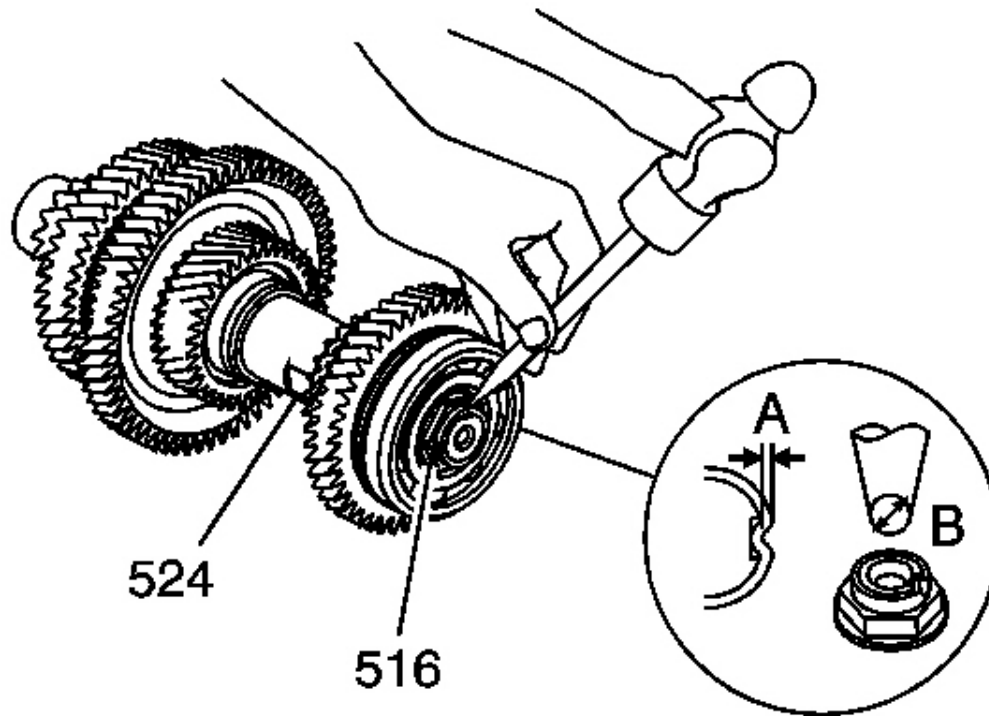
Staking The Output Shaft Nut In Place On Output Shaft Using A Punch
